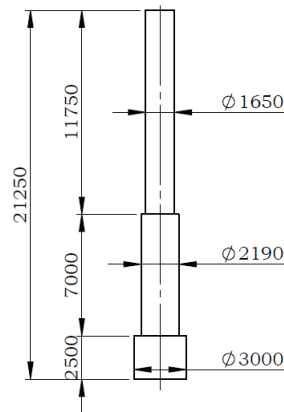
Dimensions hydraulic hammer IHC S-2500
